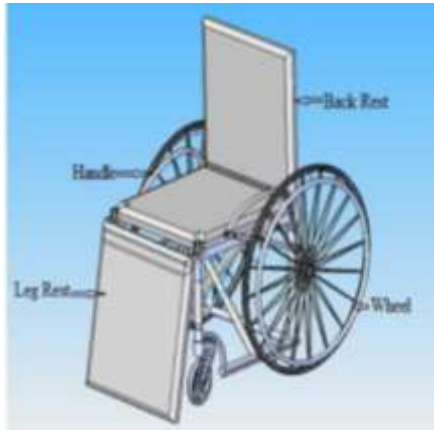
ISO Metric View of the Wheel Chair Design.-CAD Model
